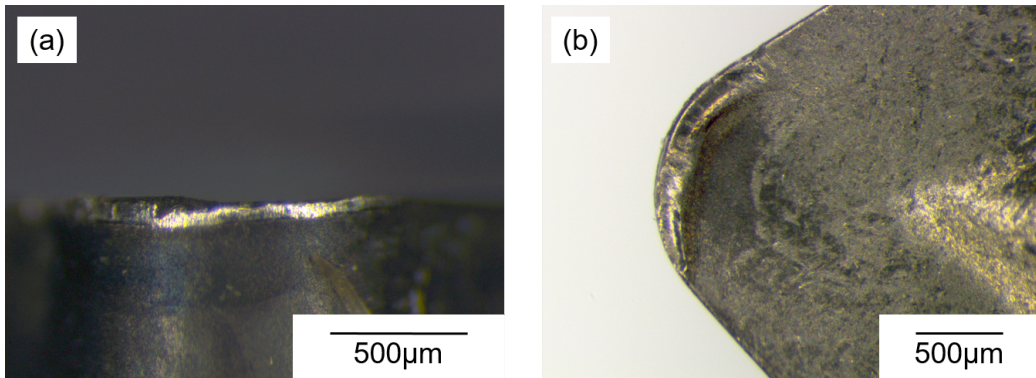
Microscope images showing the degree of tool wear after trial 1.2.4 on billet 3.2. Showing (a) the flank face and (b) the rake face.
